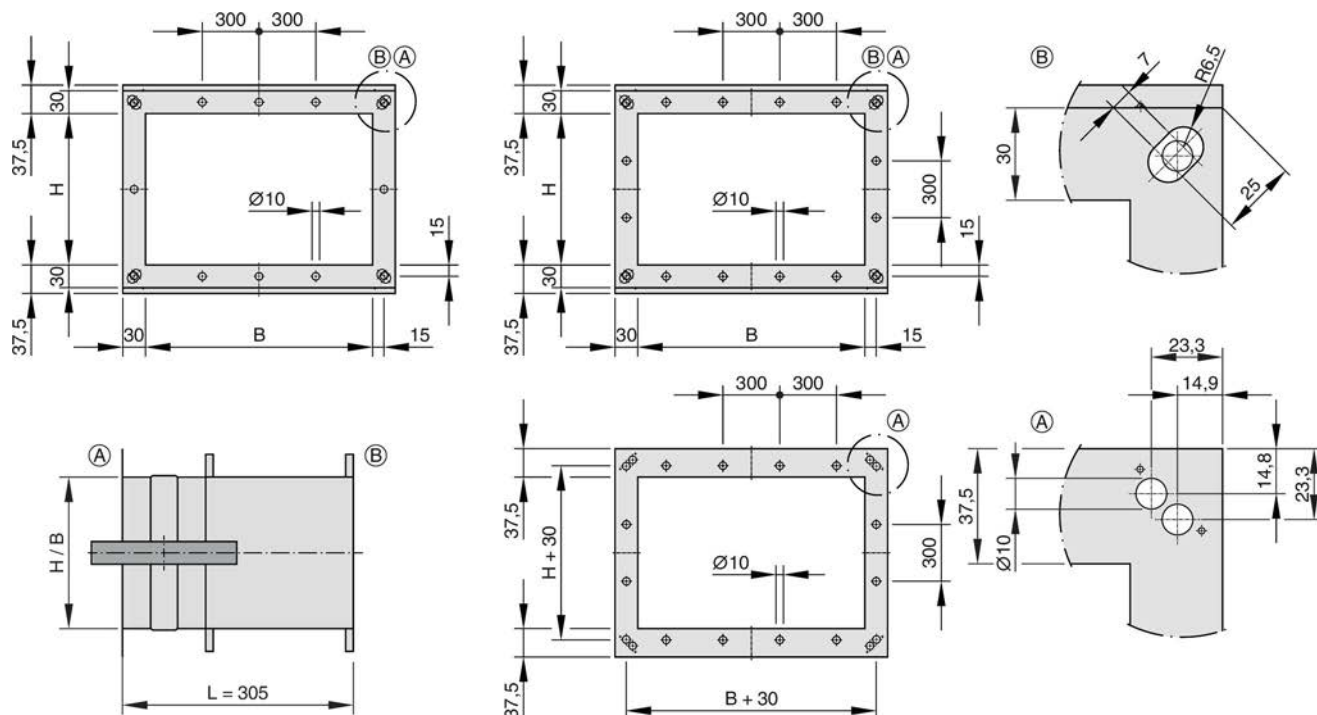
Flange holes $L = 305$ mm – uneven and even number of holes
